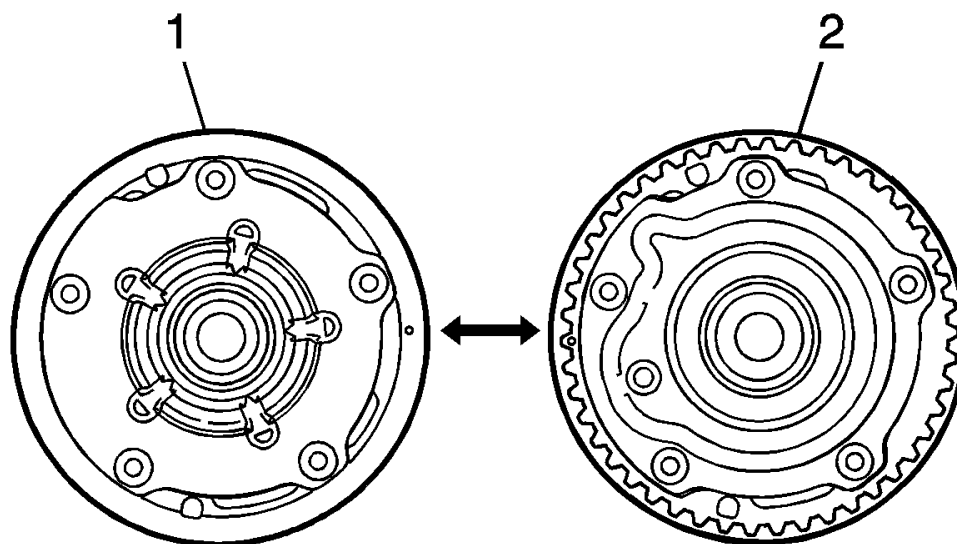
Location & Direction Of Intake/Exhaust Adjusters
